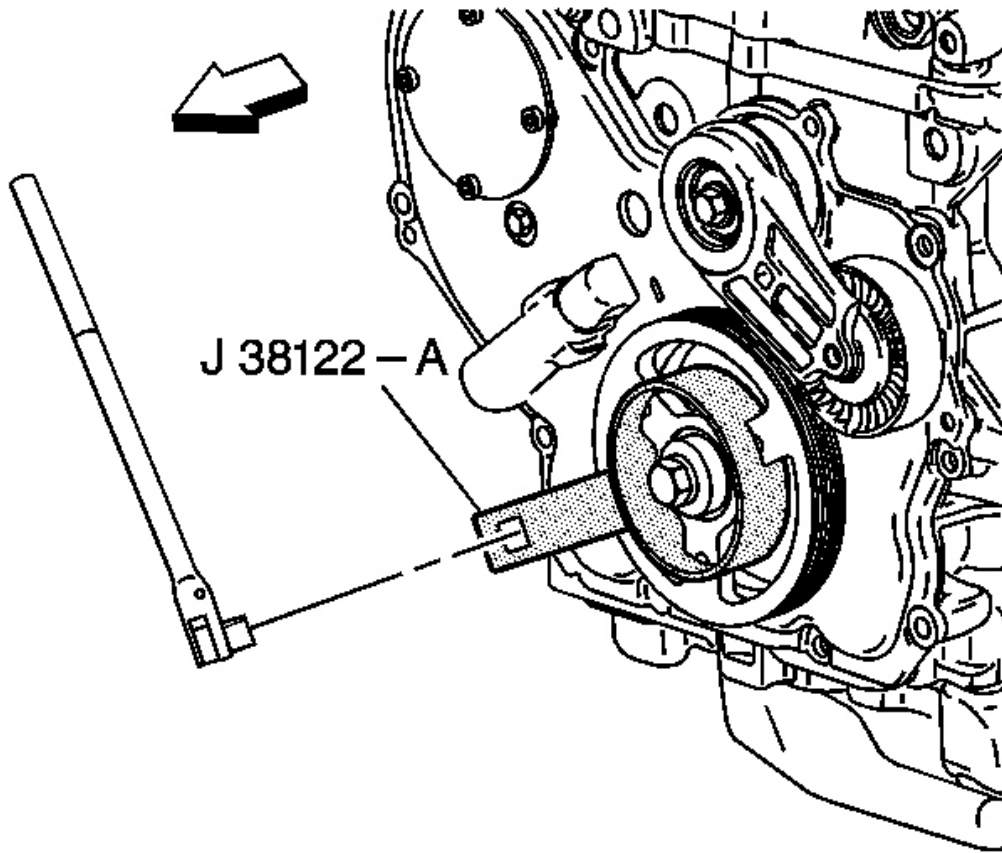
View Of Harmonic Balancer Holder J38122-A
